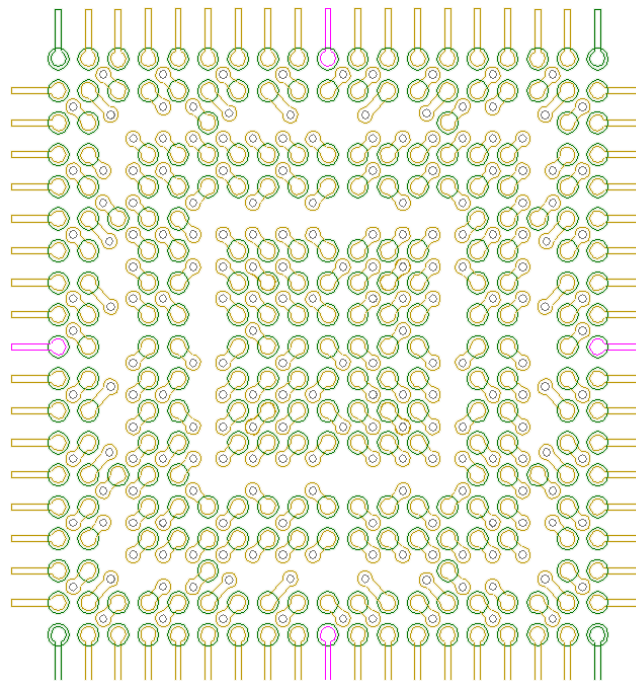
• Suggested Board Layout of Soldered Pads for CS196 CSPs (PCB Lower Layer)
